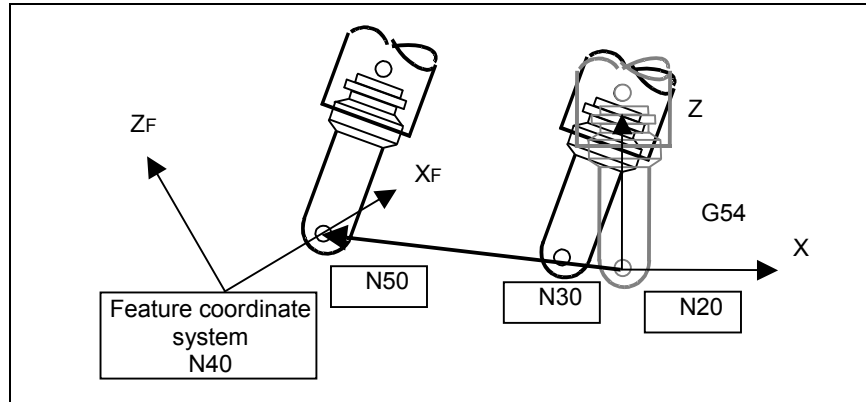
(b) Example of operation 2 (tool rotation type)
